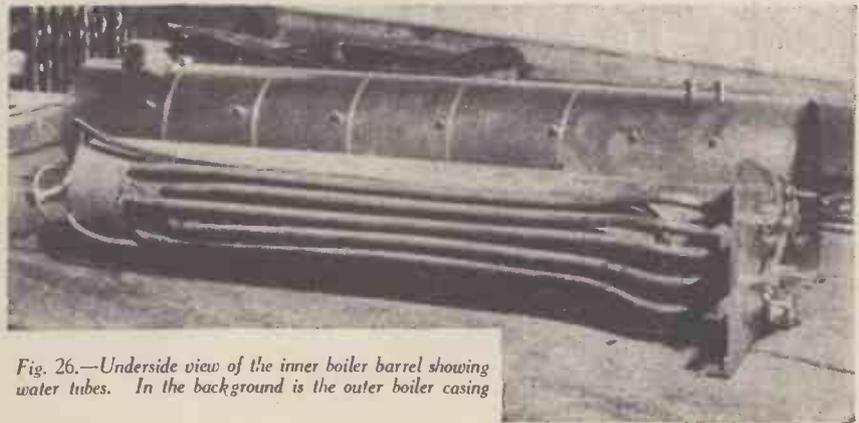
Underside view of the inner boiler barrel showing water tubes. In the background is the outer boiler casing
